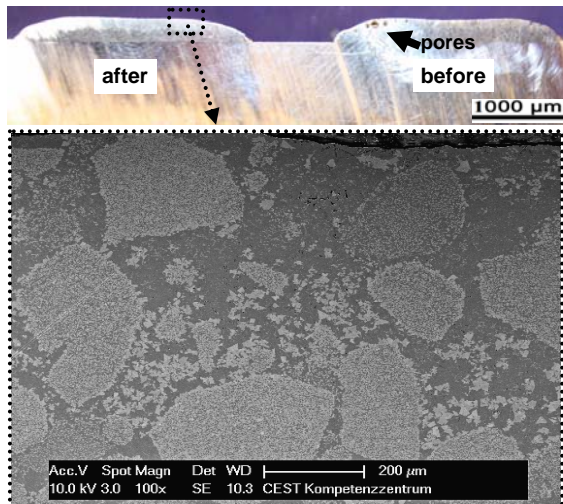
Cross-section of weld deposit and SEM image of hardfacing
